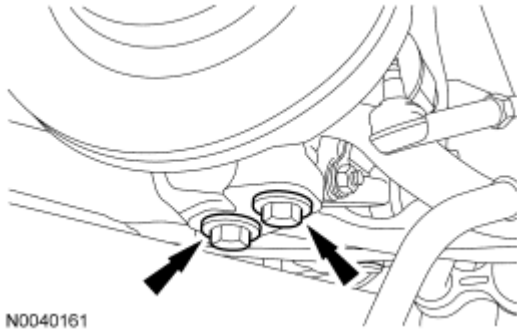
Locating Y-Pipe Bolts And Nuts
